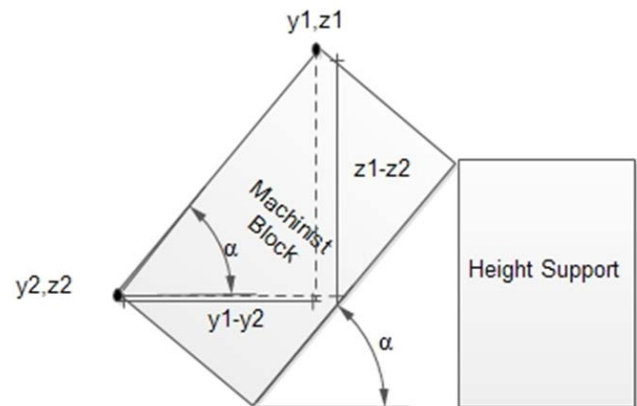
Schematic showing how the angle of the machinist block is determined.
